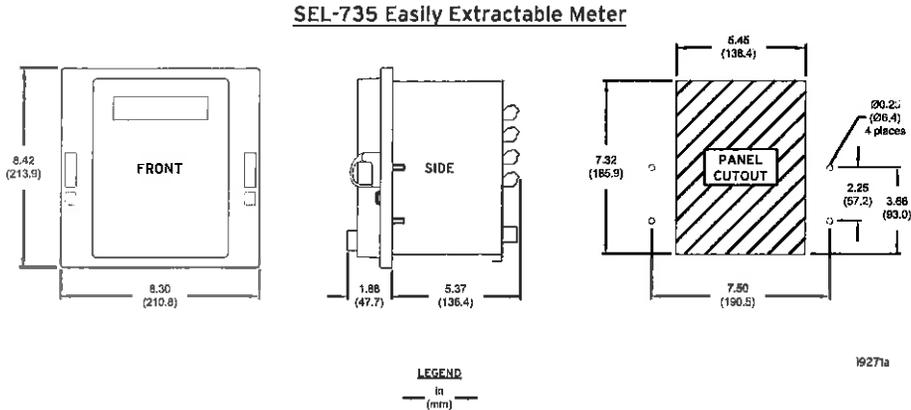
SEL-735 Easily Extractable Meter Panel-Mount Dimensions
